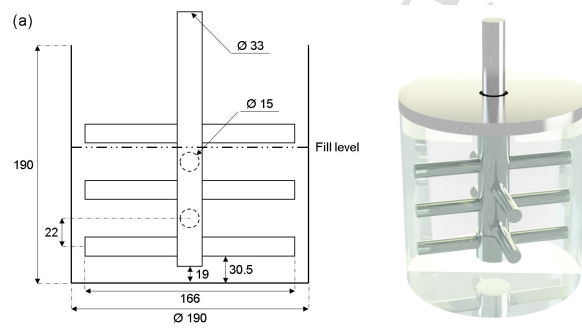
(a) Schematic representation of the mill with all key dimensions marked in millimetres. (b) 3D CAD model of the mill used [40].
